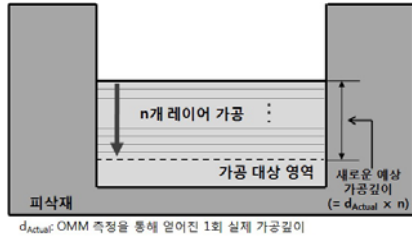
Schematic diagram of laser beam machining for compensating the machining error
